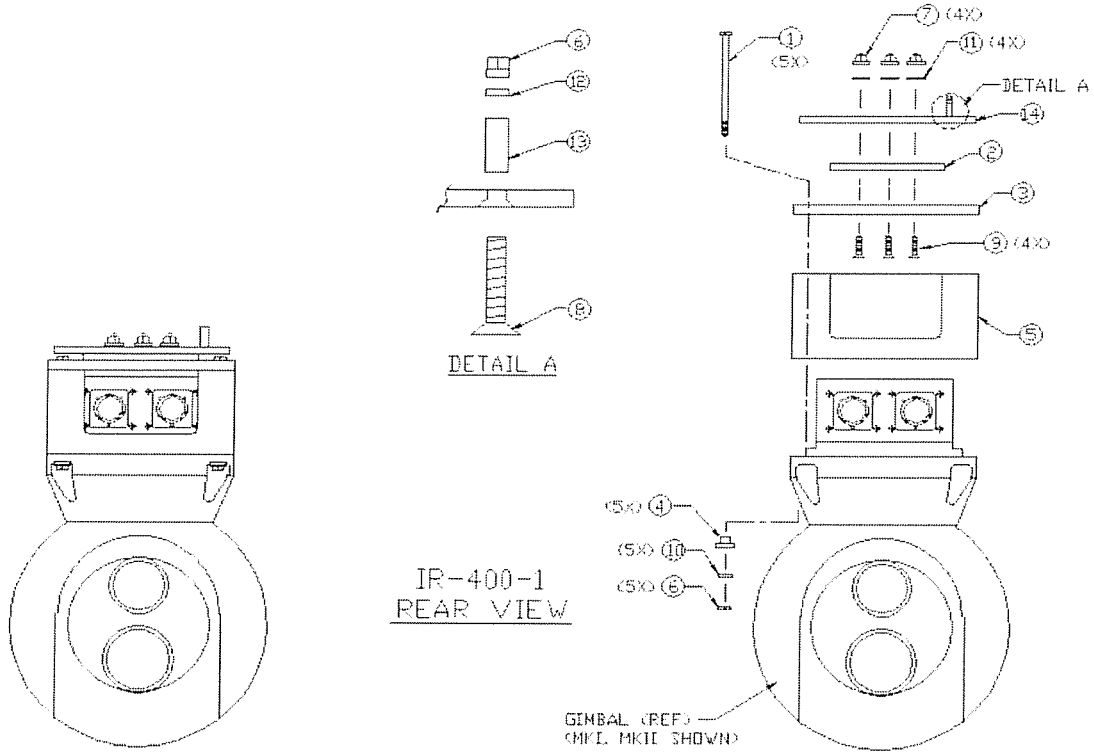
A: IR-400-1 Gimbal Adapter Assembly
